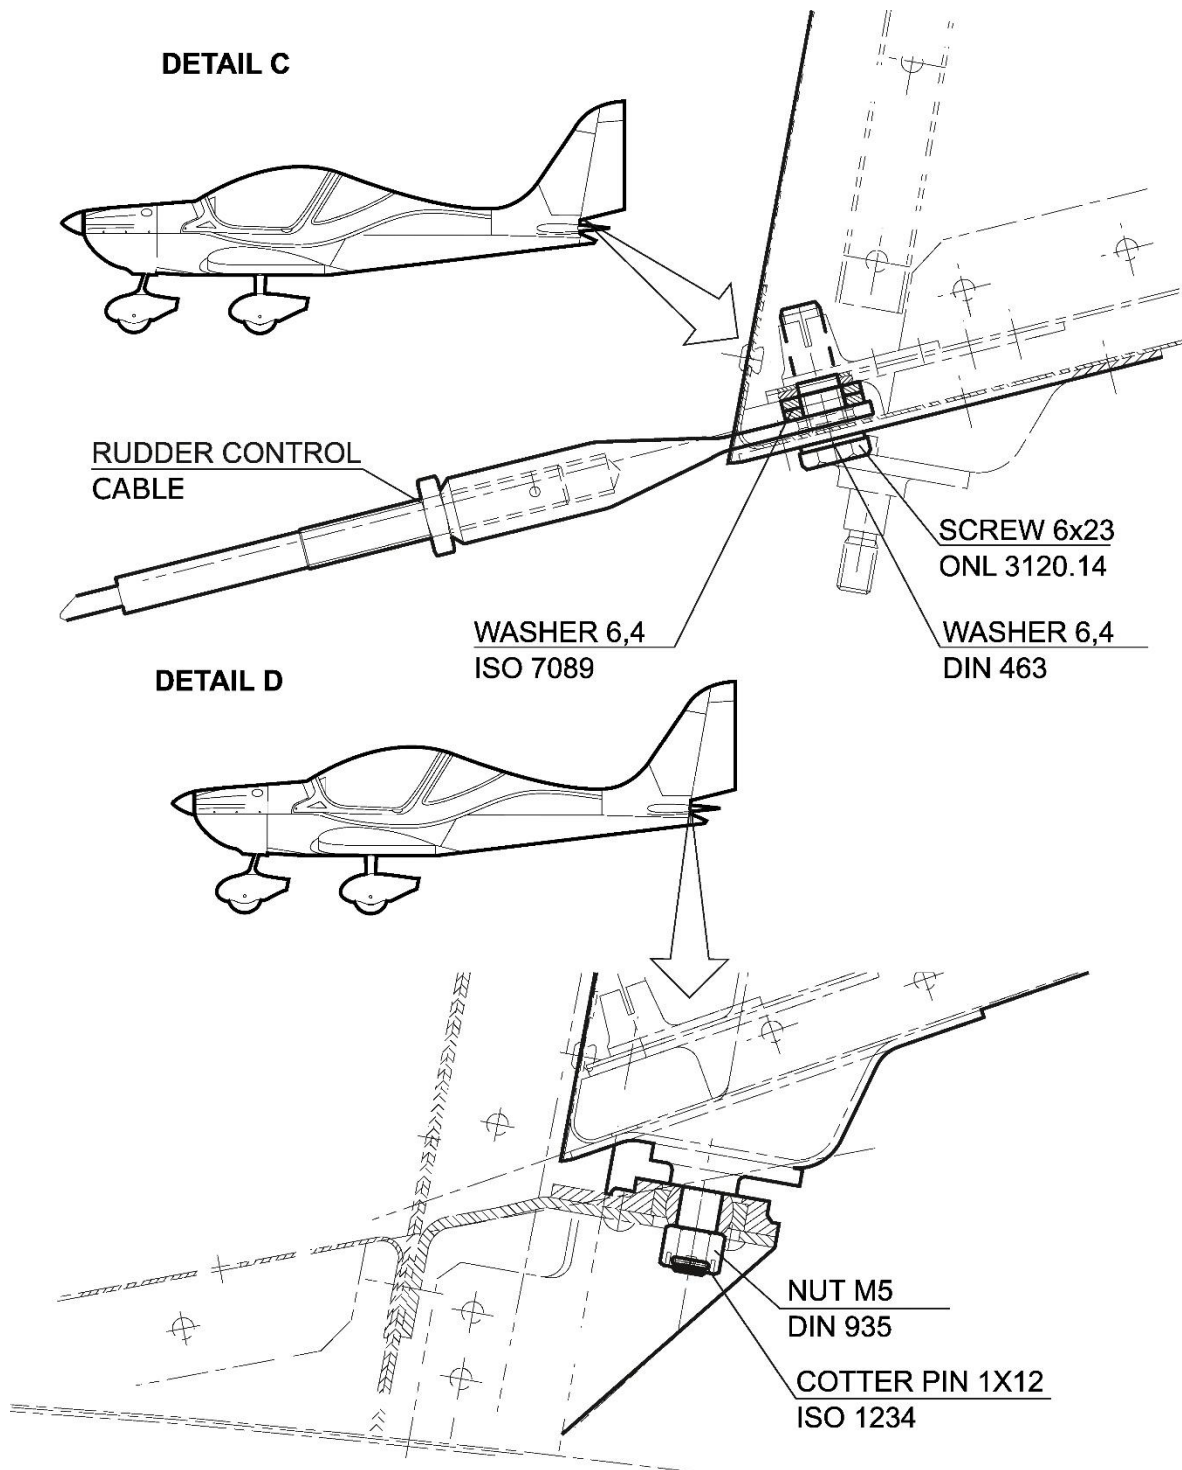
Rudder control cable attachment and rudder lower hinge - details C and D
